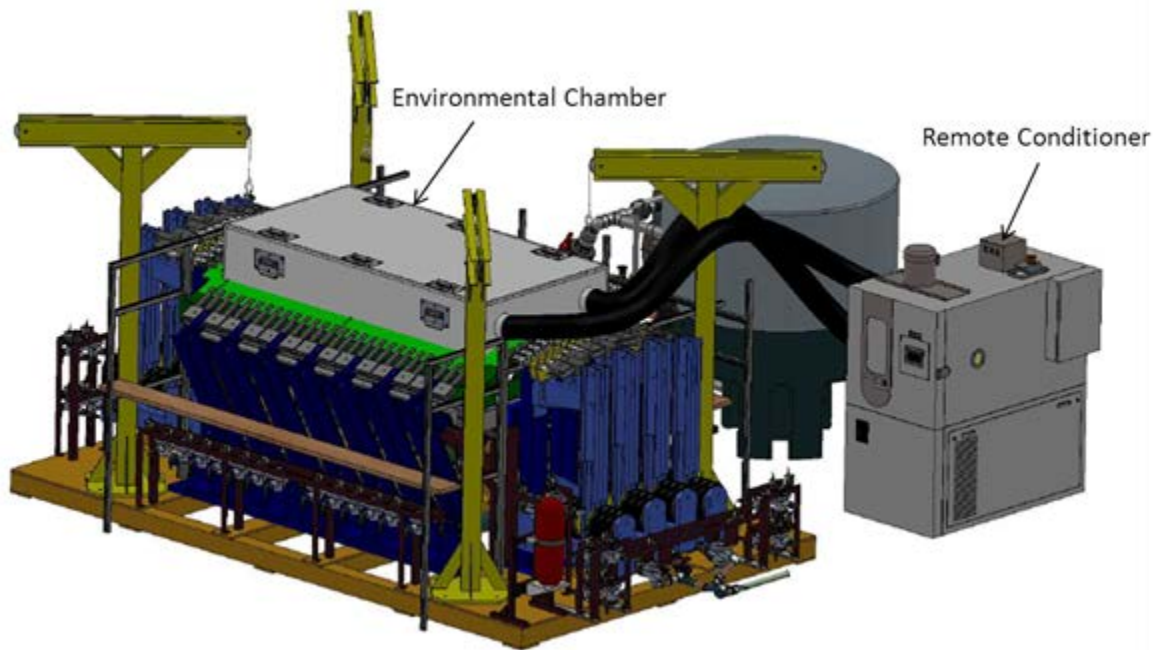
FASTER fixture for mechanical and environmental loading of fuselage panels
